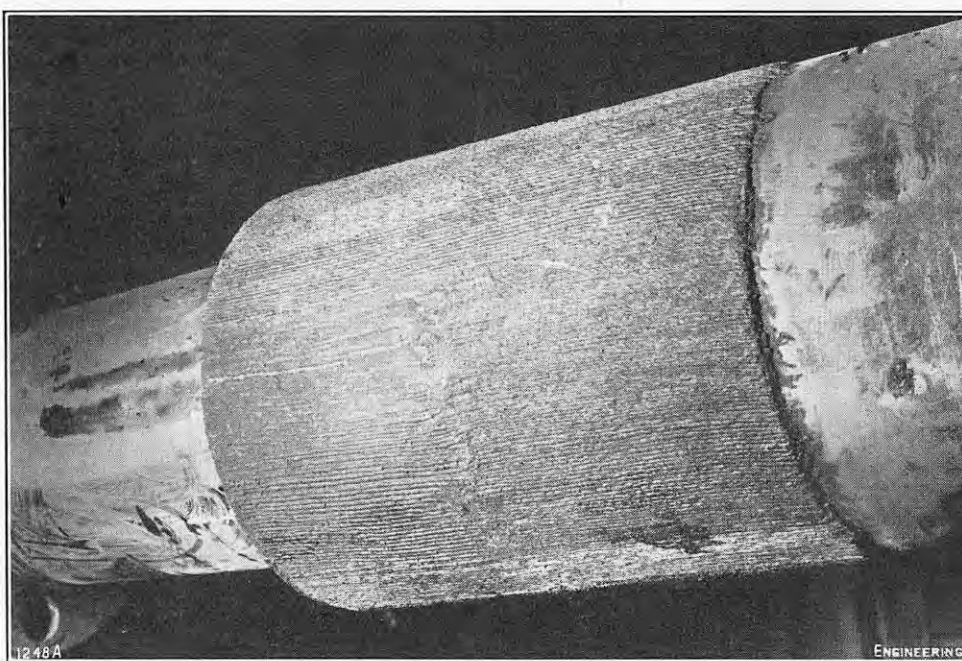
GEARWHEEL SHAFT BUILT UP BY WELDING.
